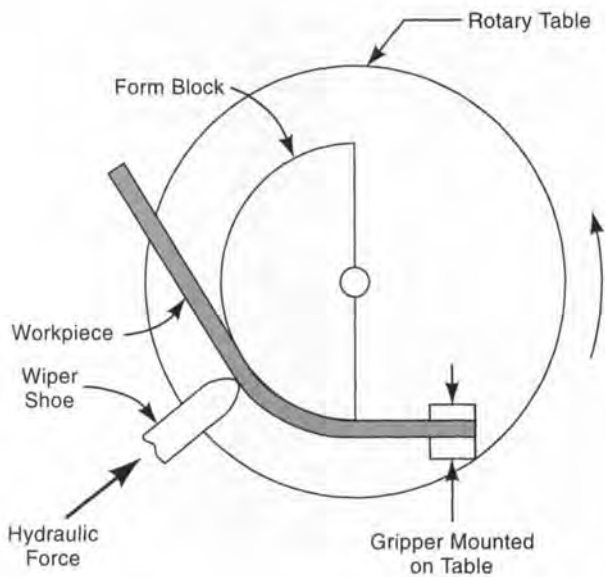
F3c Compression forming. The wiper shoe presses the workpiece against the form block. As the block rotates, bends are made in the workpiece.
